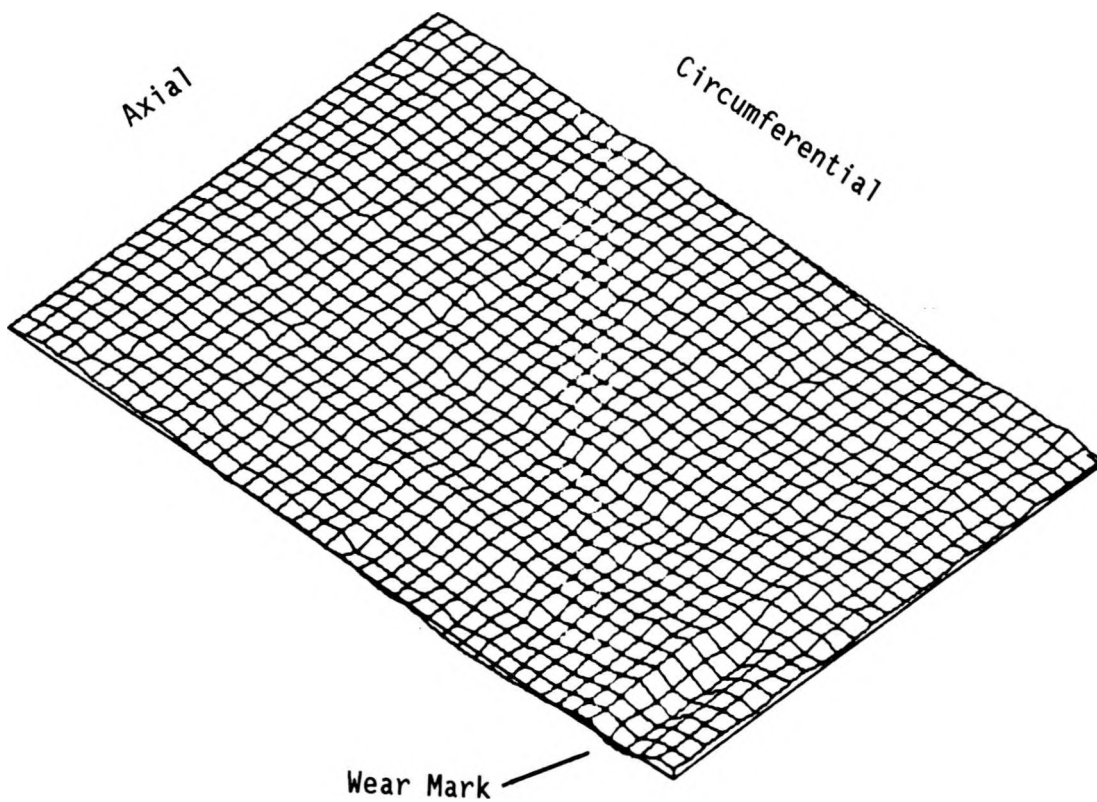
Scan of Wear Mark on Blanket Rod 1605629
